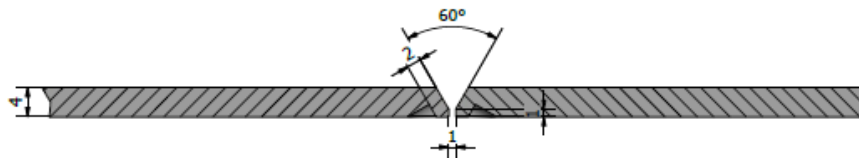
Size of plates for butt-welded joints and groove geometry.
